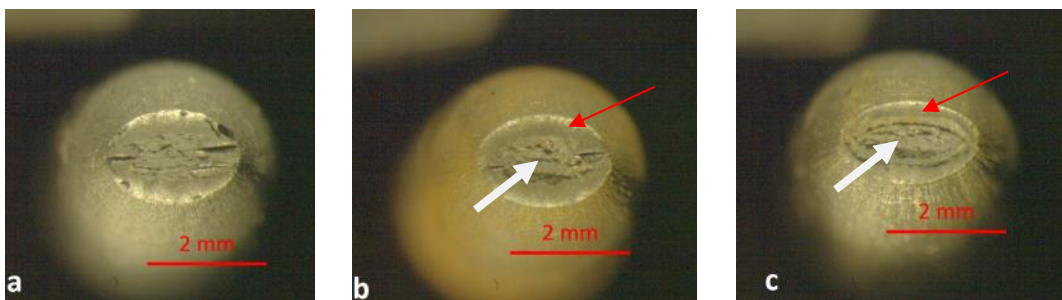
Fracture surface of round tensile as-received samples tested at 21°C and -70°C
